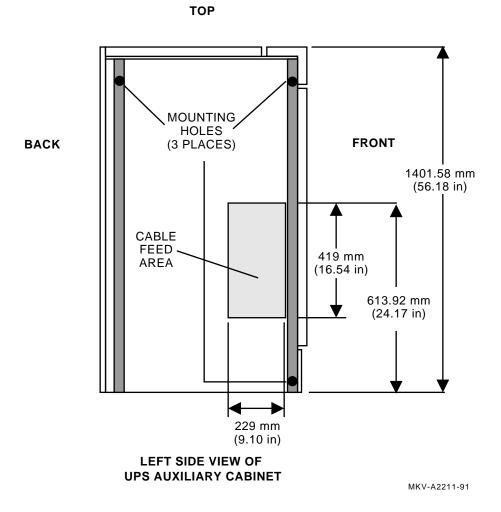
UPS Auxiliary Cabinet Mounting Holes
